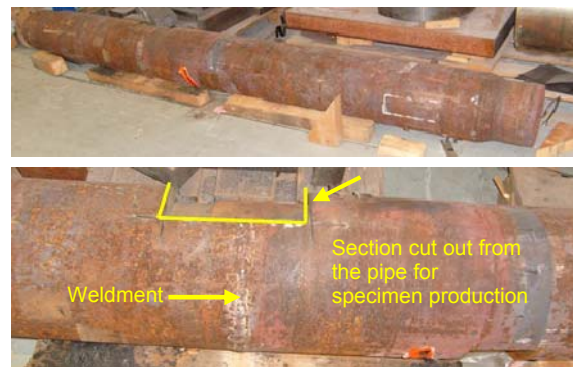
INTEGRITY of repair welds test component
